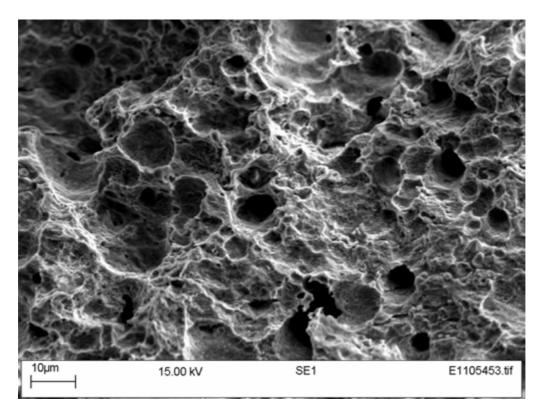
SEM fractograph, showing detail of figure 33 and fractography consistent with ductile microvoid coalescence type fracture.
